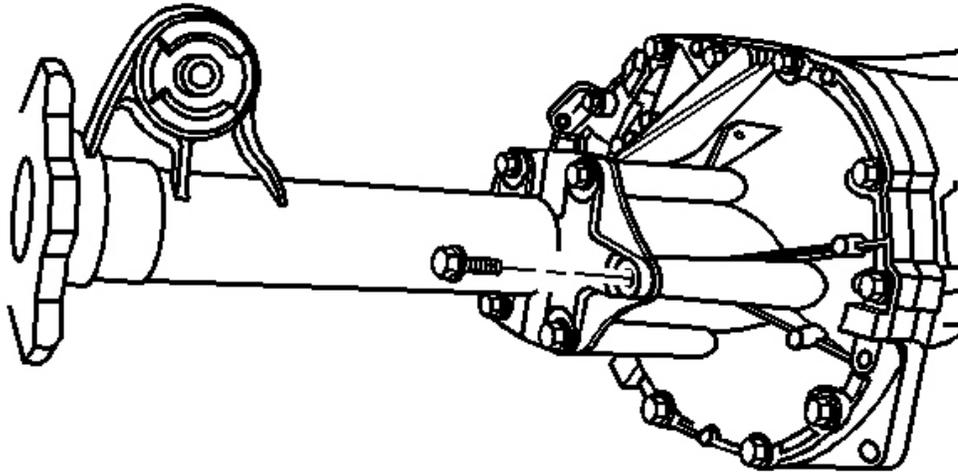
Inner Axle Housing & Inner Axle Shaft
